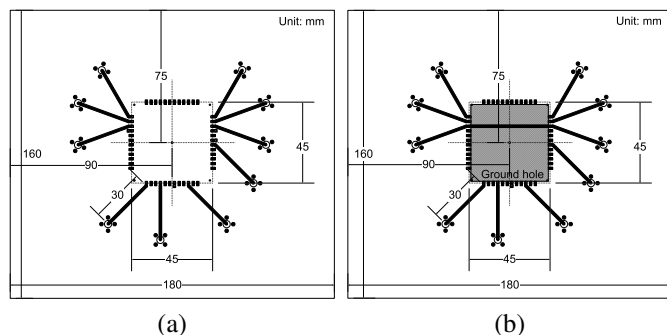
PCB patterns without (a) and with (b) hole in the ground plane.
